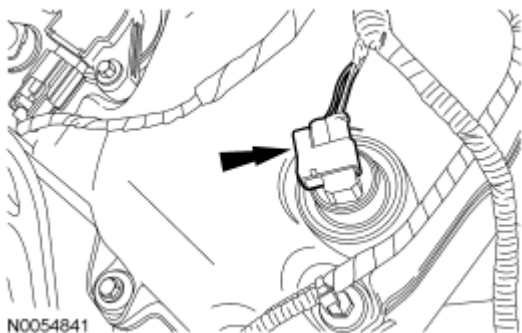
Locating RH Variable Camshaft Timing (VCT) Solenoid Electrical Connector
